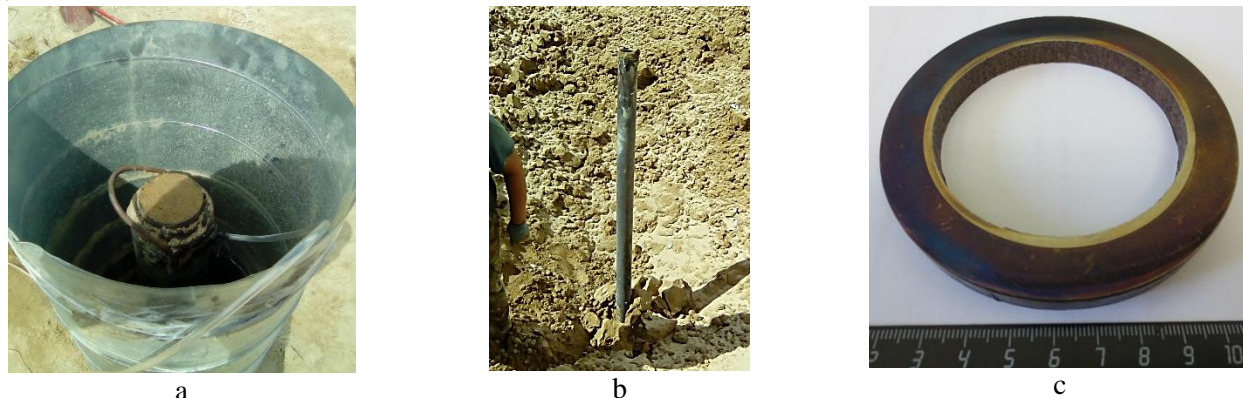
Production of bimetallic tube: a – assemble before explosive welding; b – produced according bimetallic tube said method; c – bimetallic annular sample
